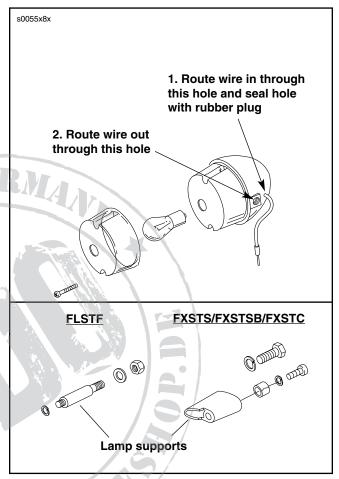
Rear Turn Signal Assembly (turn signal rotated 90° to show harness holes)
